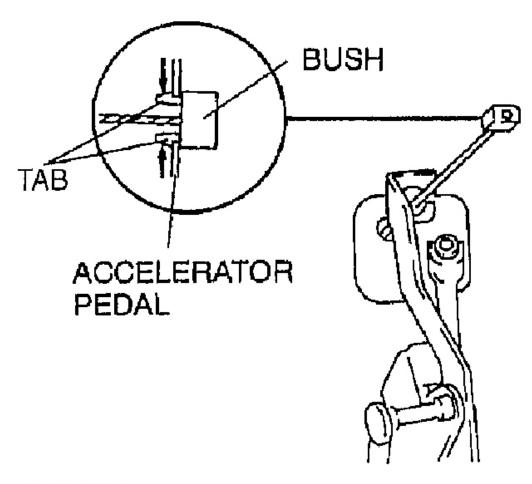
Removing Actuator Cable Courtesy of MAZDA MOTORS CORP.
